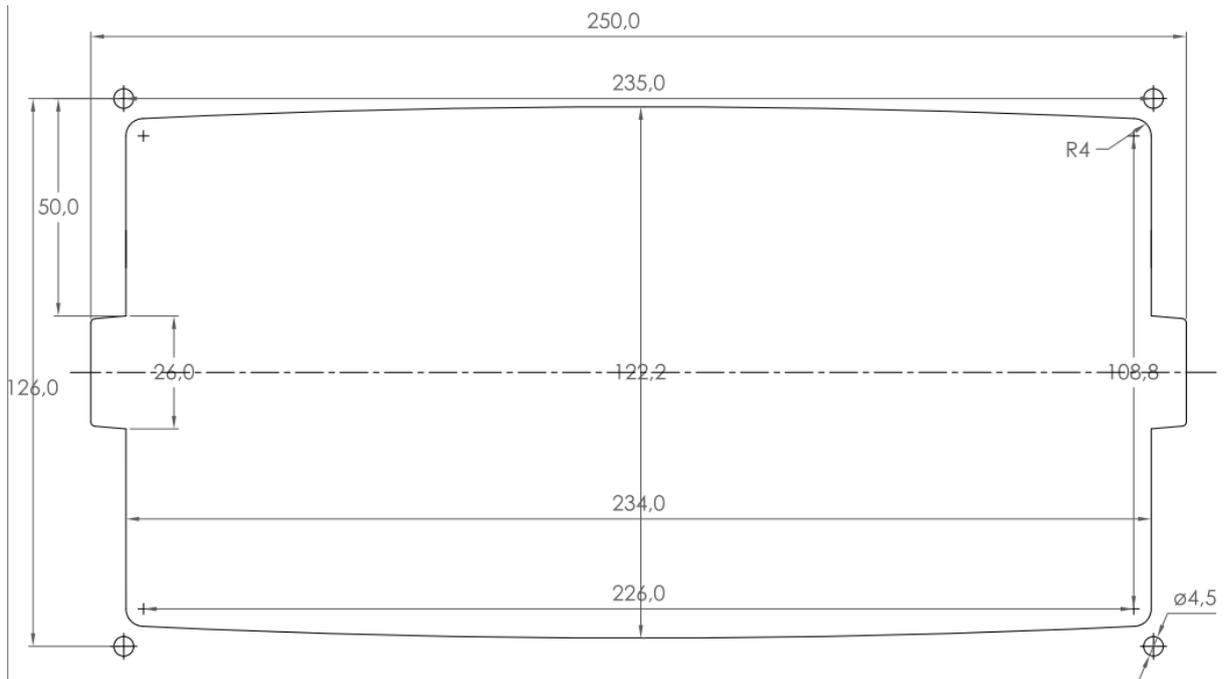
R5 SUPREME CDU Mechanical Drawing (mm)
